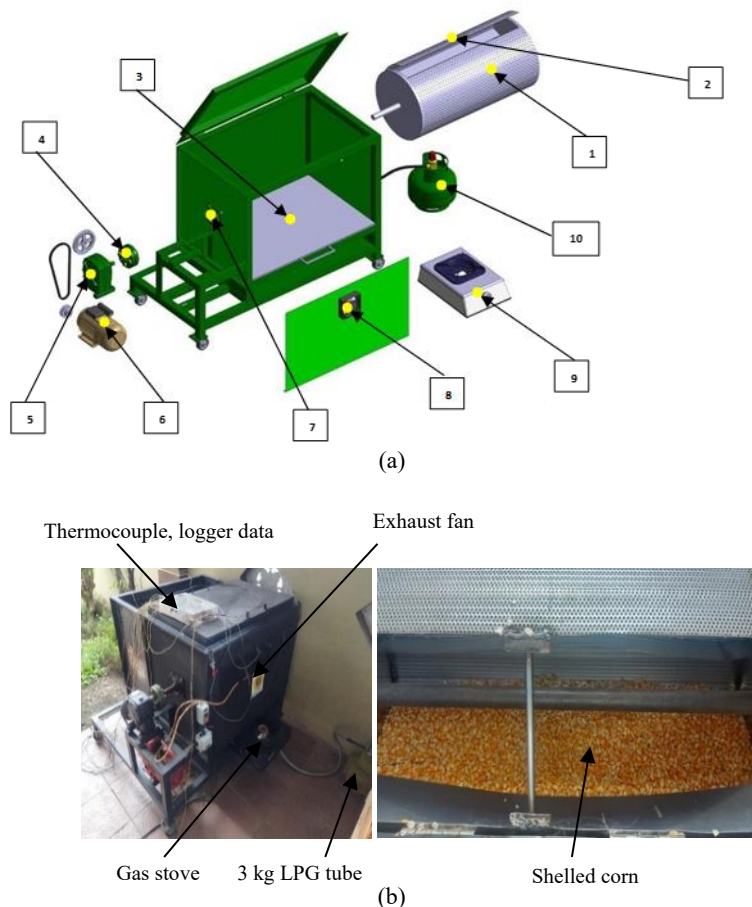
(a) Schematic for rotary dryer run with LPG energy, and (b) Testing samples of corn grains. (1. Rotary cylinder, 2. Rotary cylinder cover, 3. Heating plate, 4. Gearbox connector, 5. Gearbox, 6. Electric motor, 7. Bearing, 8. Exhaust fan, 9. Gas stove, 10. LPG cylinder)
